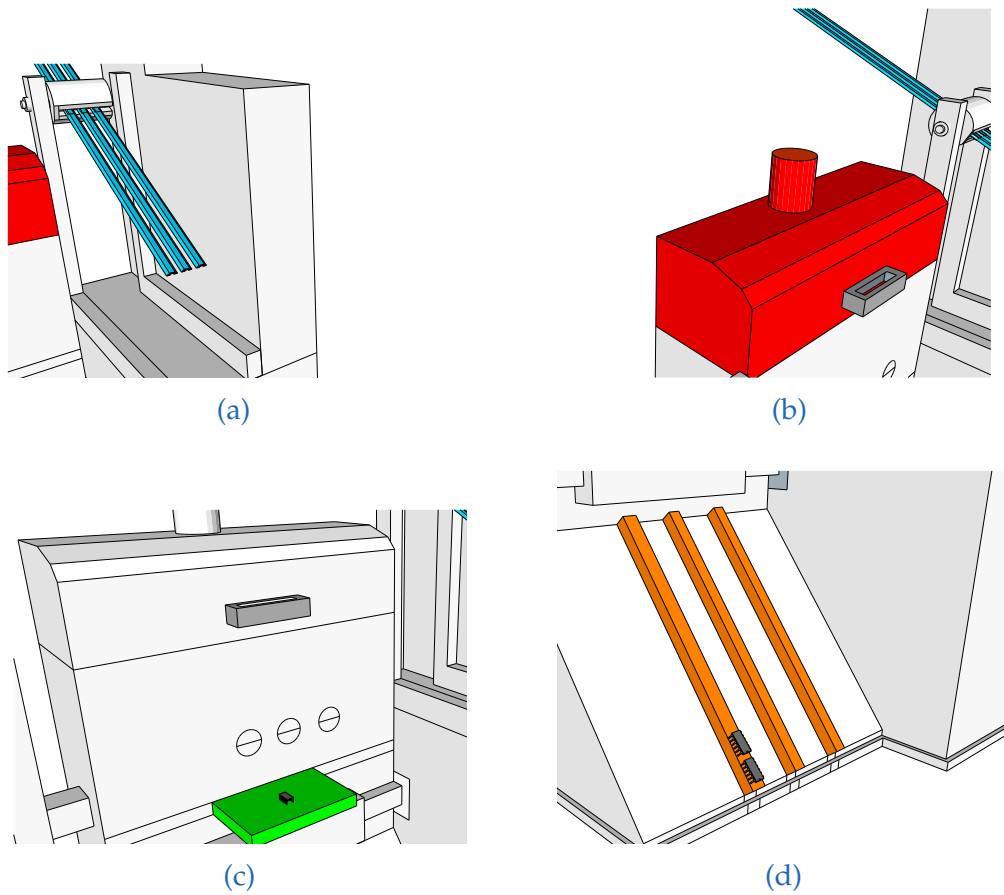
Most important parts of this handler type. (a) shows the shipping tubes, which contain the electronic devices. (b) After flipping the tubes, the devices are passed to the heating chamber. (c) During the TLP test the device is placed on loadboard. (d) After the test the chips are placed in the unload trays.
